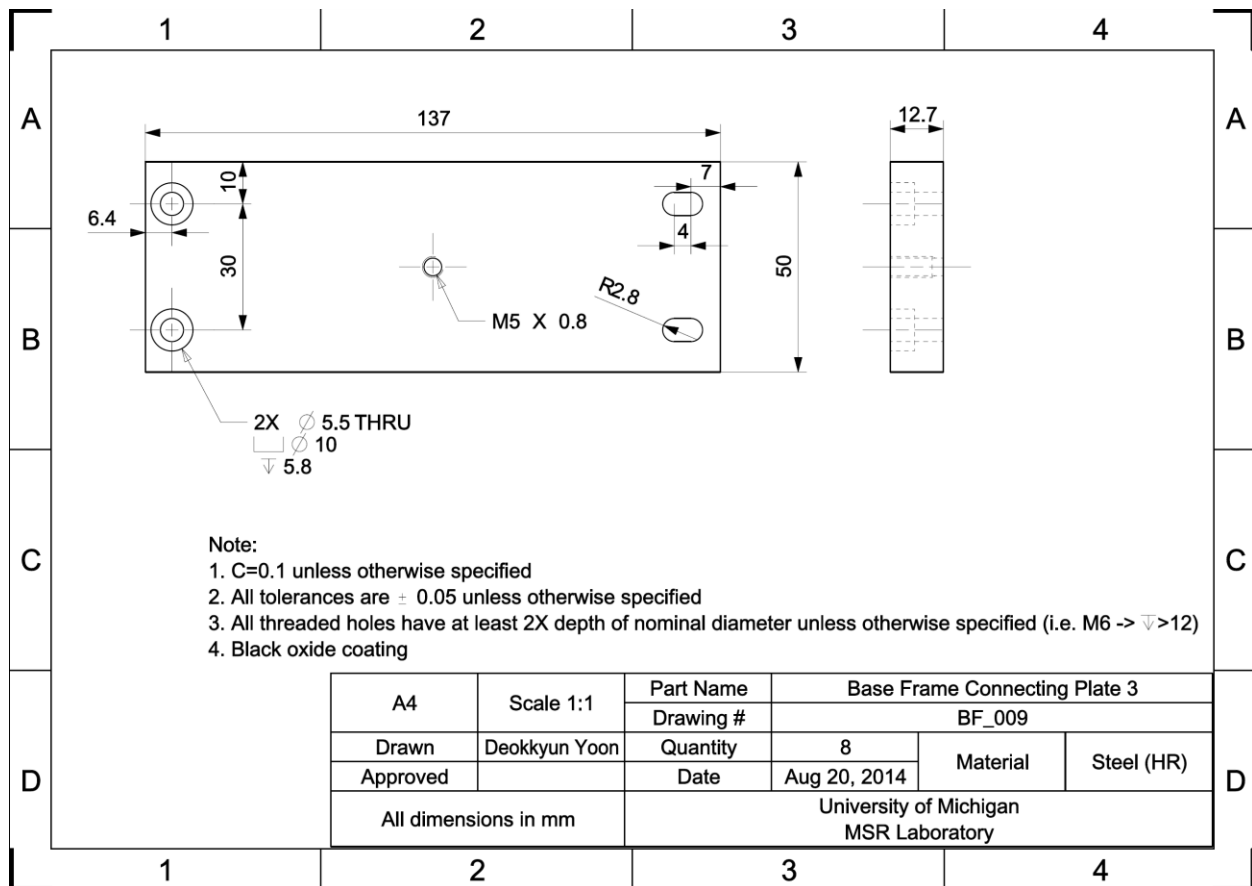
Manufacturing drawing of Base Frame Connecting Plate #3.
